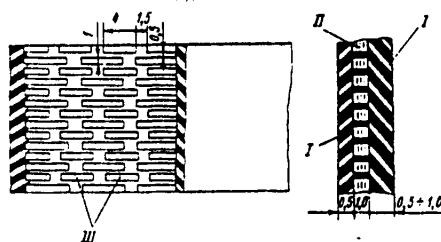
Structural version of a damping covering (dimensions in mm). I -- flexible diaphragm; II -- liquid filler; III -- longitudinal cavities or projections.
